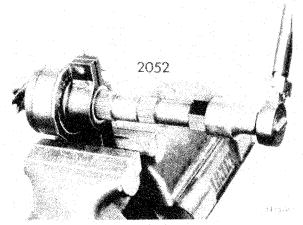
1st gear needle bearing inner race, loosening/tightening
